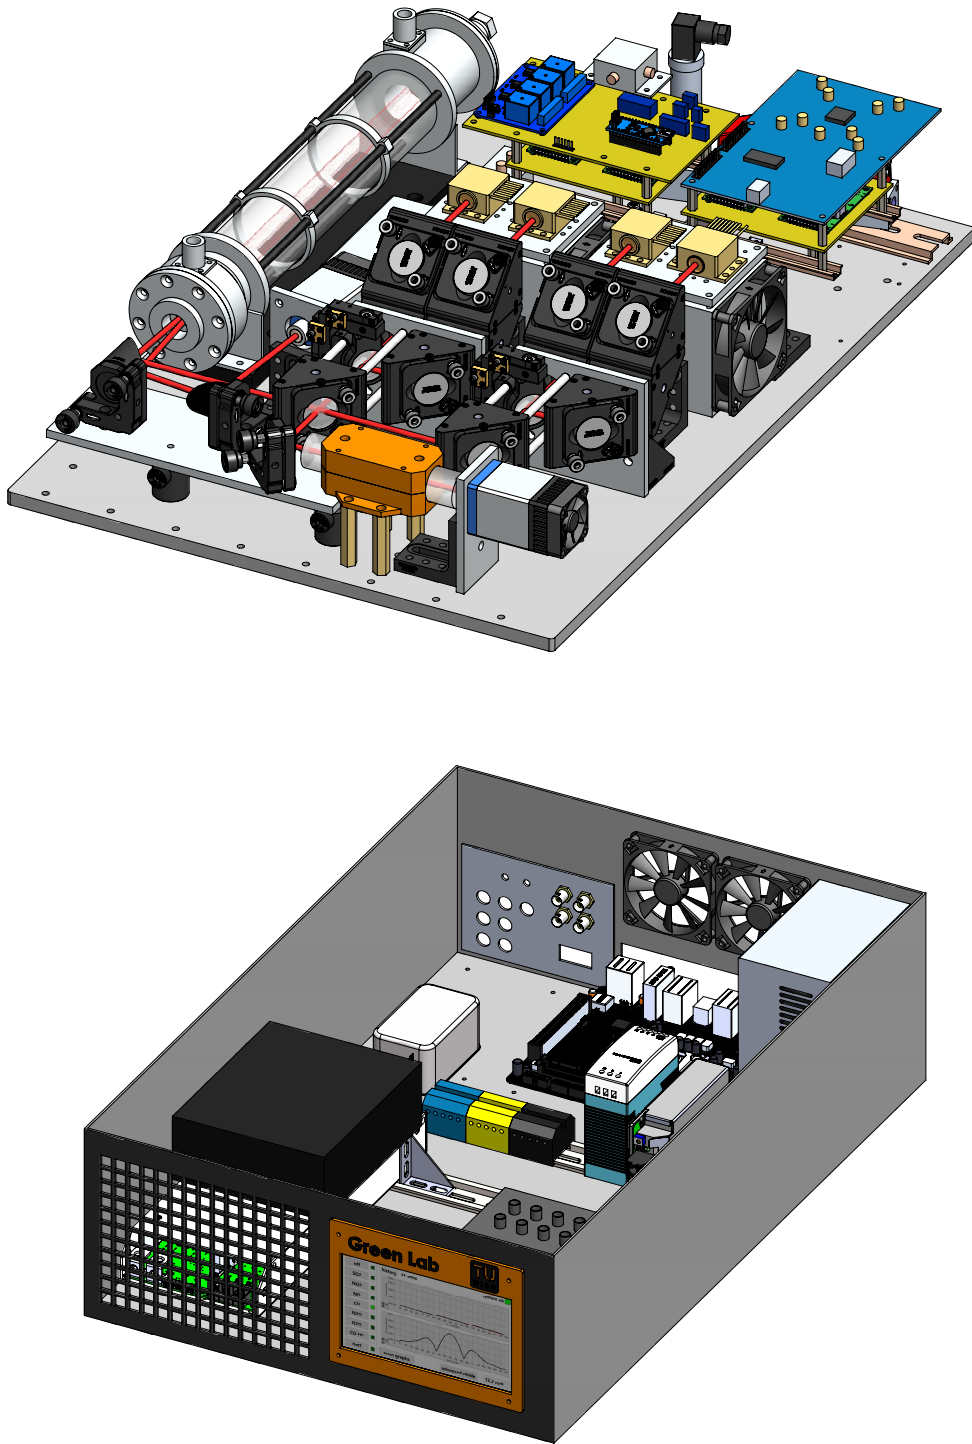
CAD drawings of the optical setup (without enclosure, top) and the electronics racks (without cover plate, bottom).
